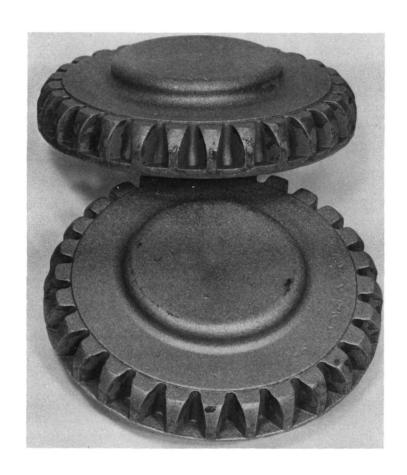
Ausformed Gear Forgings After Additional Tooling and Die Modifications, 100 Per Cent Tooth Configuration Has Been Established Although Lack of Fill at Bottom (Upper Surfaces in Photograph) Has Created Condition of Minimal Tooth Width
